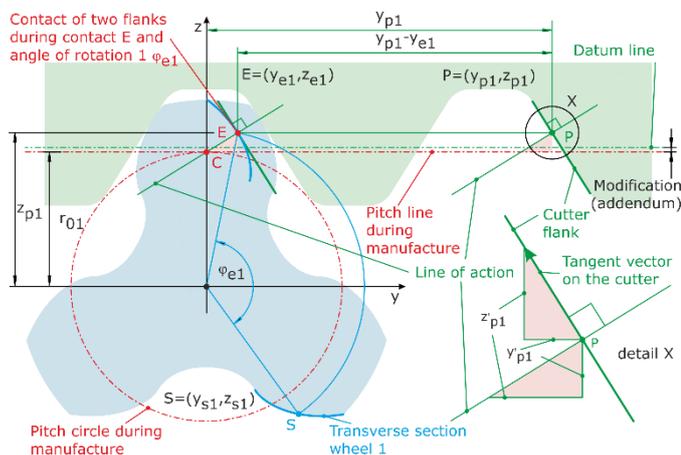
Deriving the gear geometry from the counterpart rack and the gear law
